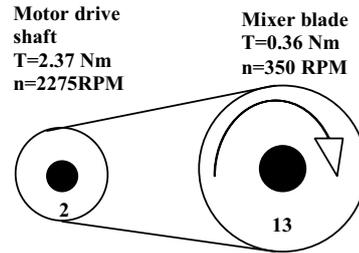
DCM drive shaft and Mixer agitator shaft and pulley system.
